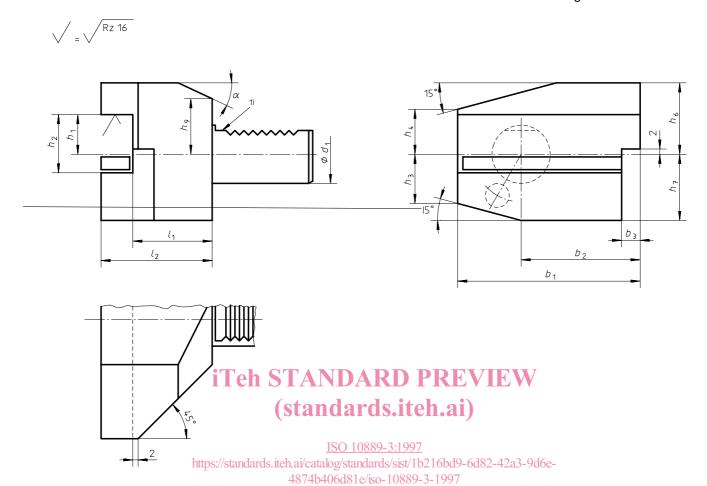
Type B7 tool holder, overhead, right-hand, long
